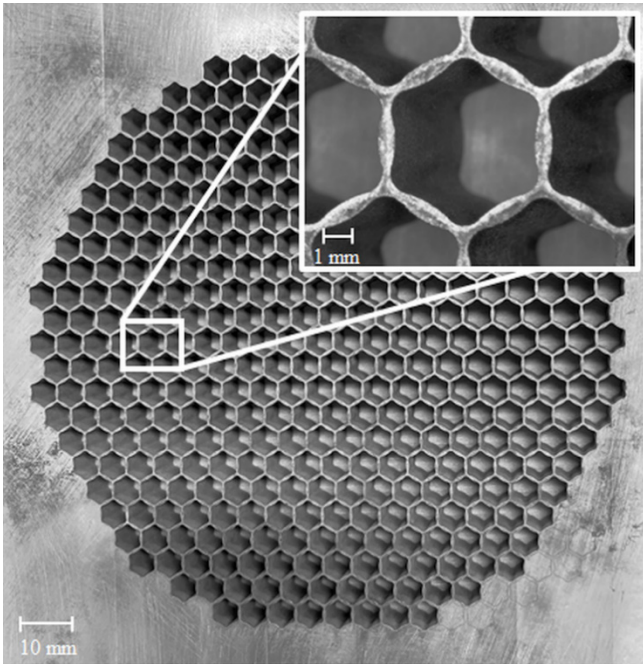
Manufactured dichroic filter. The insert provides a close-up view of a single perforation cell, highlighting the details of its structure.
